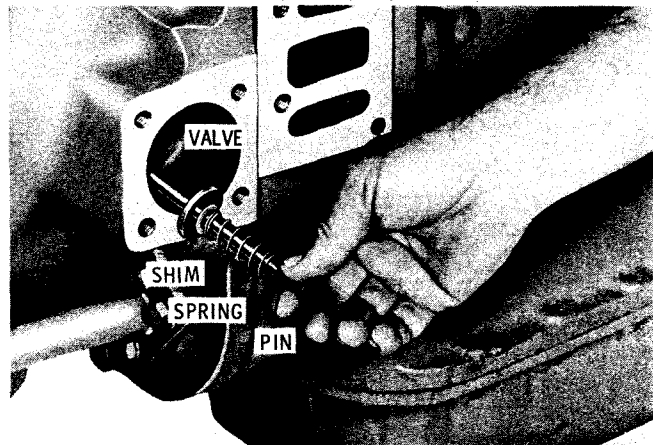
Installing lubrication regulator valve components (CLT) S1739
